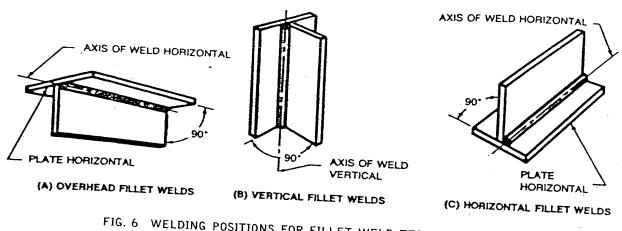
WELDING POSITIONS FOR FILLET WELD TEST ASSEMBLIES
